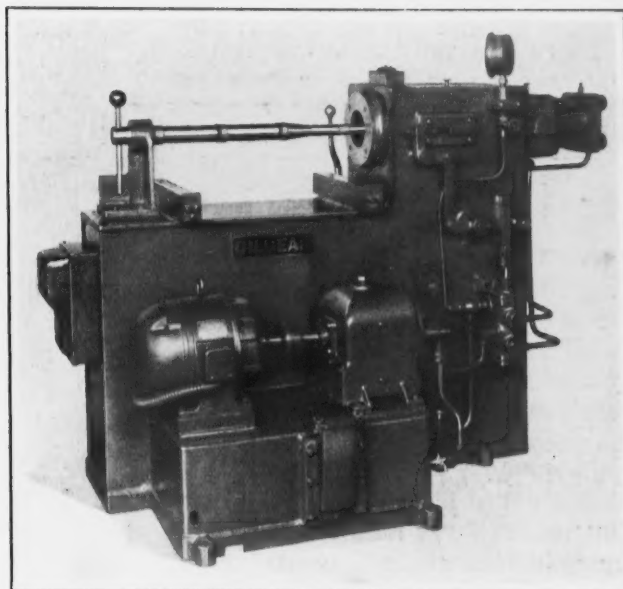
Machine of Welded Steel Construction in which a Mistake in Height was Rectified by Cutting Several Inches of Material from Between the Base and Headstock and Welding the Headstock Back in Place
